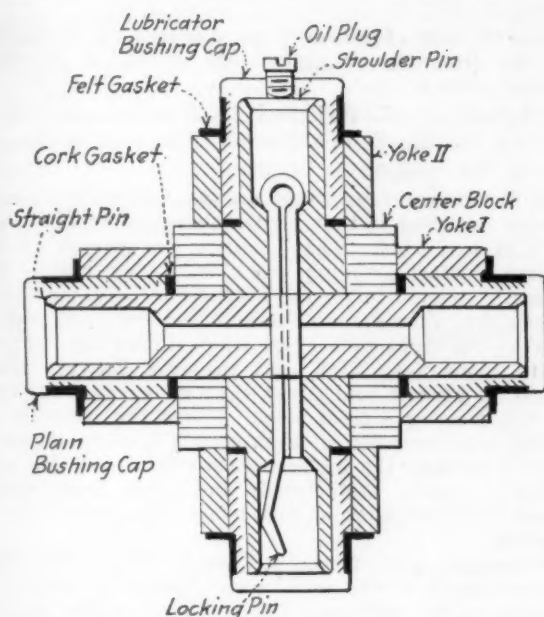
BLOOD BROS. JOINT INTRODUCED IN 1904. This Consists of Two Yokes Connected Flexibly by a Cross, Is of Compact Construction, Has Large Bearing-Surfaces and Permits of Operation at Large Angles. It Is Oil-Lubricated
